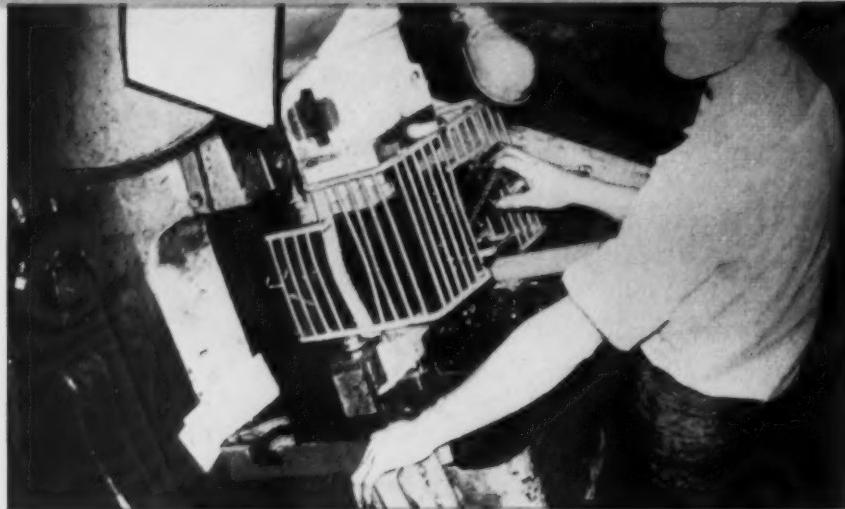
Here is an inclined chute feed magazine and air ejection setup with a one button control, allowing the free hand
